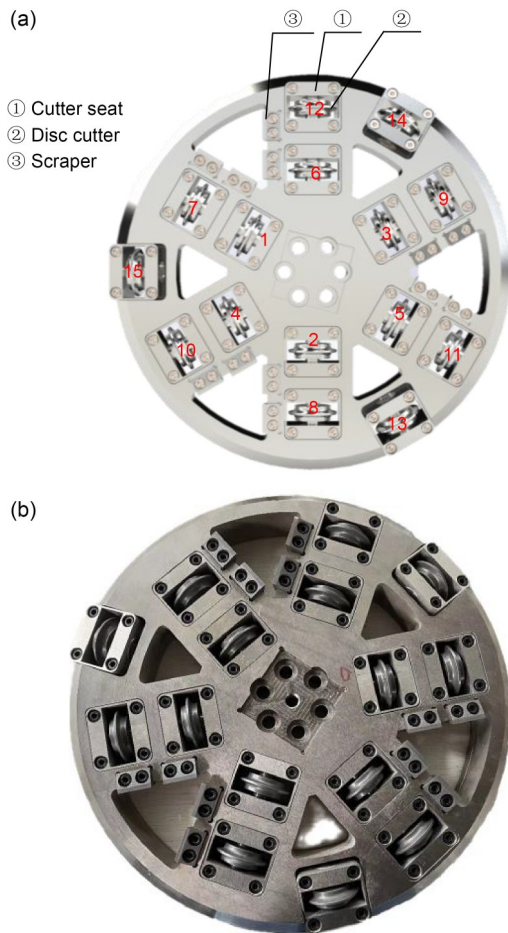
(a) Schematic structure and disc-cutter numbering diagram; (b) assembly of the cutterhead
